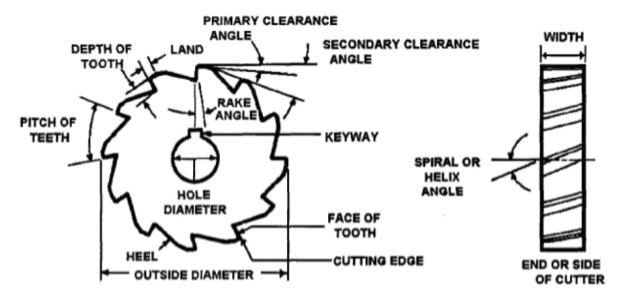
Nomenclature of Cylindrical Milling Cutter
